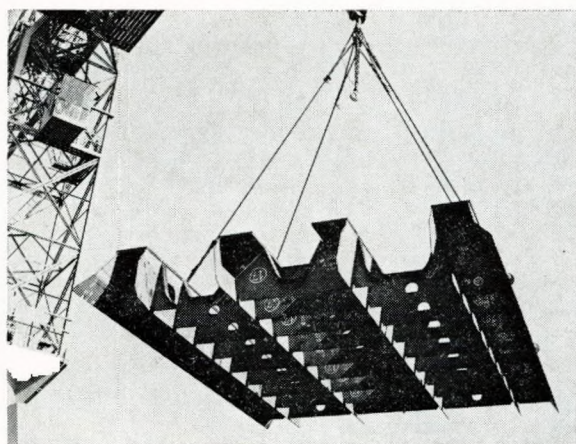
Seatings for TM 410 engines being lowered into the hold
